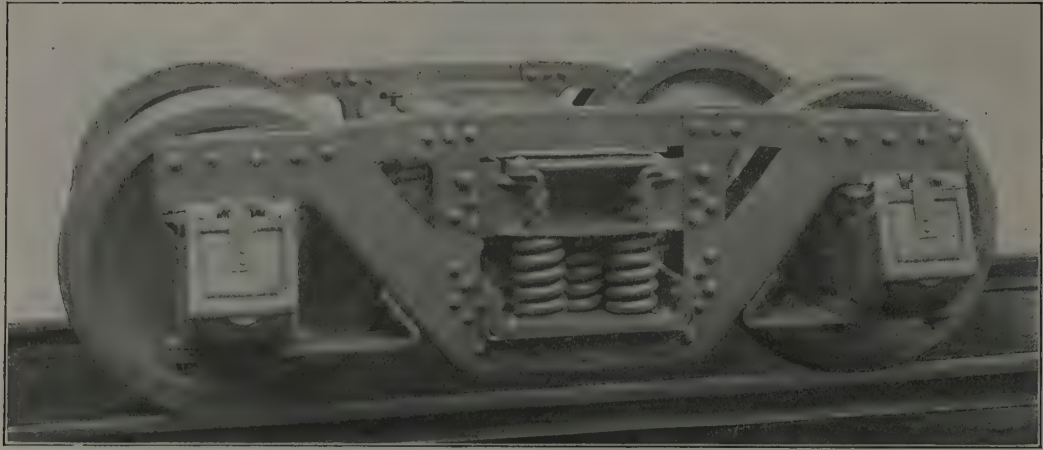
Slick Side Frame Truck for 50-Ton Cars. Cambria Steel Company.
